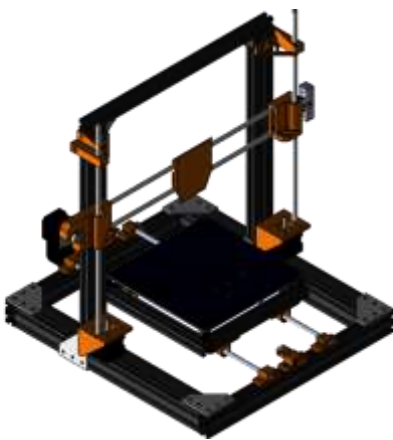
The Isometric view of the 3D printer CAD model- Reference model of metal Frame
